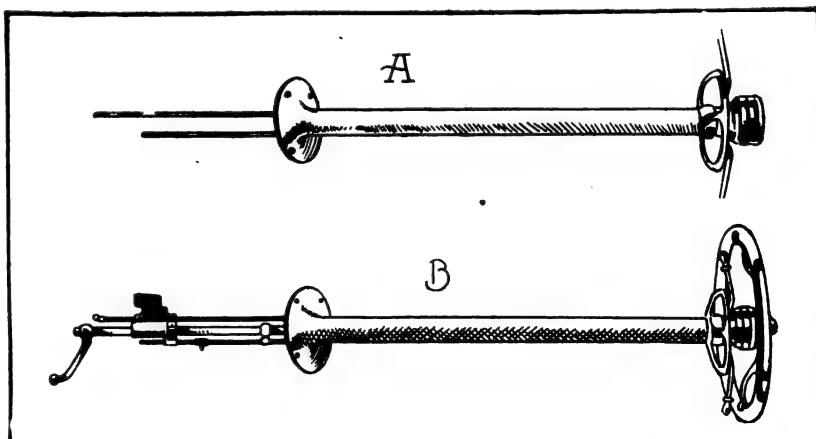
The Steering Gear Assembly of the Ford Car; A, Showing the Tube and Pull Rods; B, the Components Completely Assembled.
